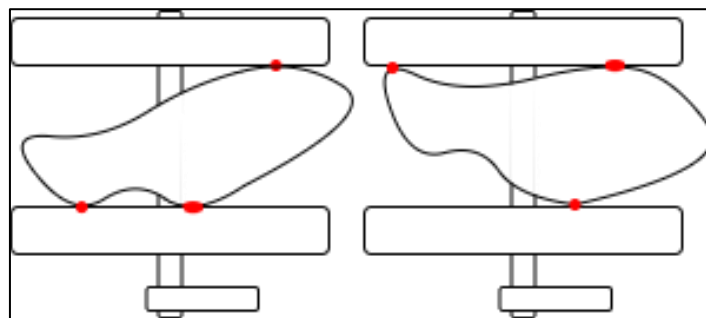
Uncertain orientation of the workpiece, due to limited contact points between fixture and piece
